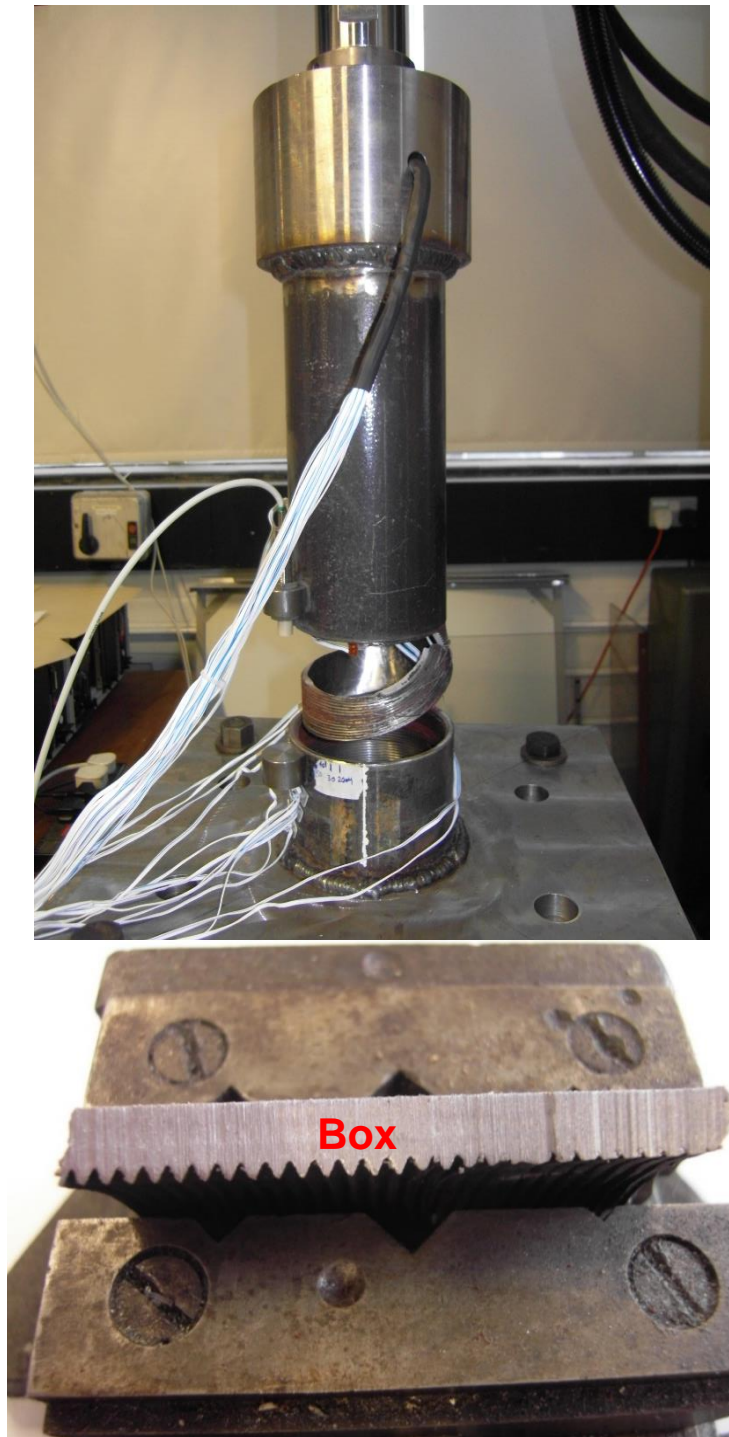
(Top) failure due to cyclic load on 4.5-inch pipe. (Bottom) box thread bending.
